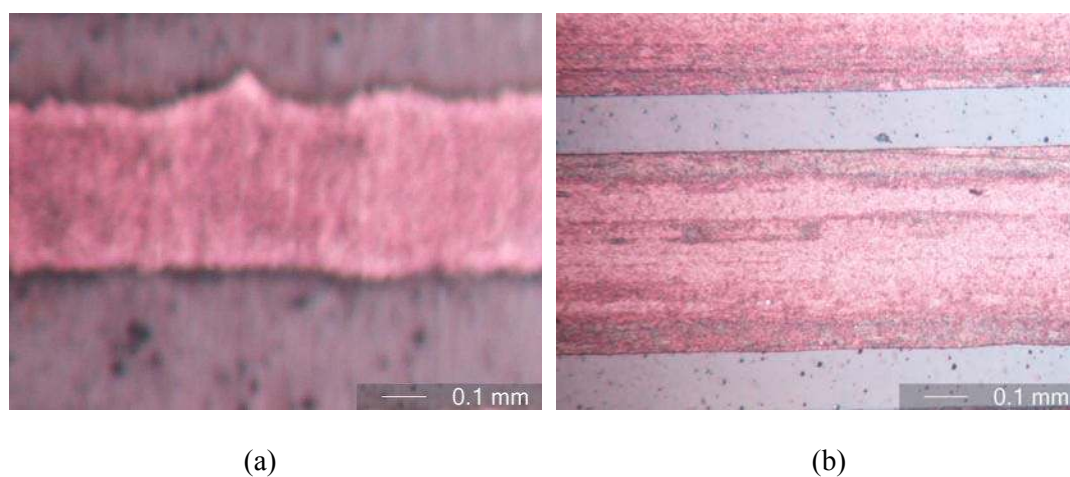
Comparison of two test patterns printed with (a) laser printer and (b) phaser printer on polyimide flexible boards.
